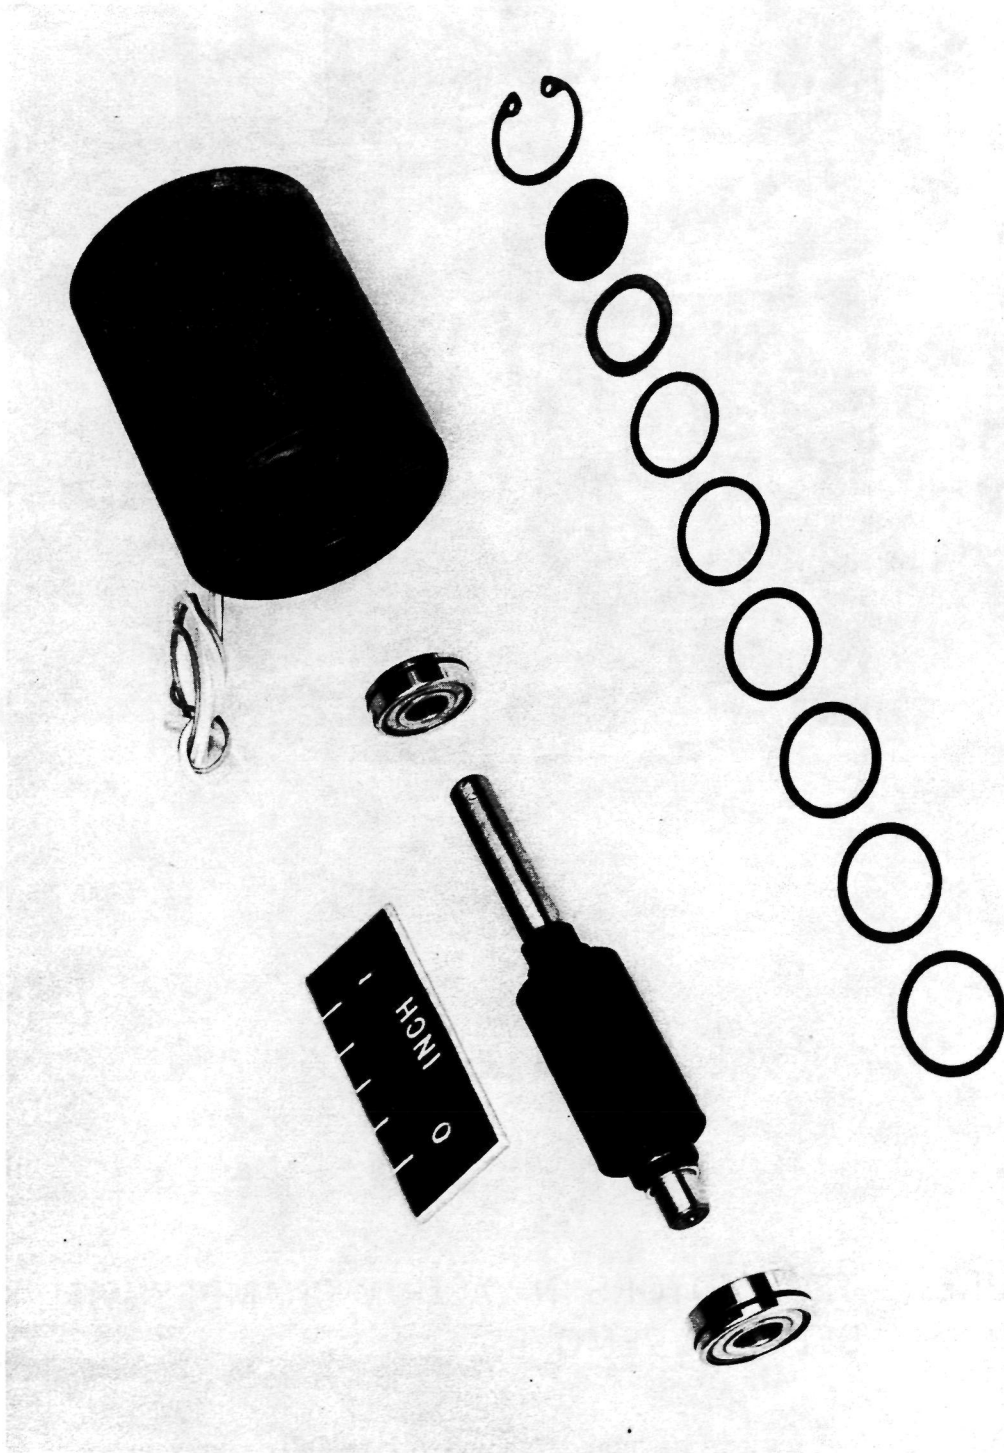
DISASSEMBLED AC MOTOR WITH R-4 BEARINGS
